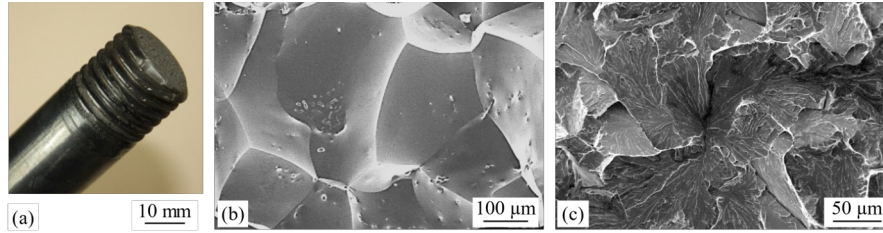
Brittle fracture surfaces. (a) Macroscopic view of a broken screw; (b) intergranular fracture of a zirconium alloy [Chosson, 2014]; (c) transgranular cleavage fracture of a bainitic steel.
